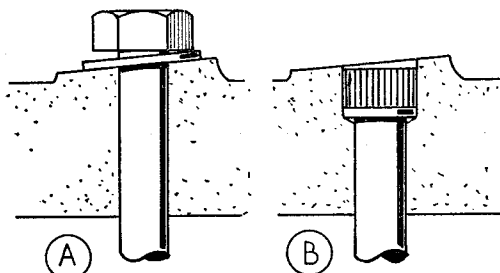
A hexagon bolt (A) and an Allen screw (B) applied to an irregular surface
